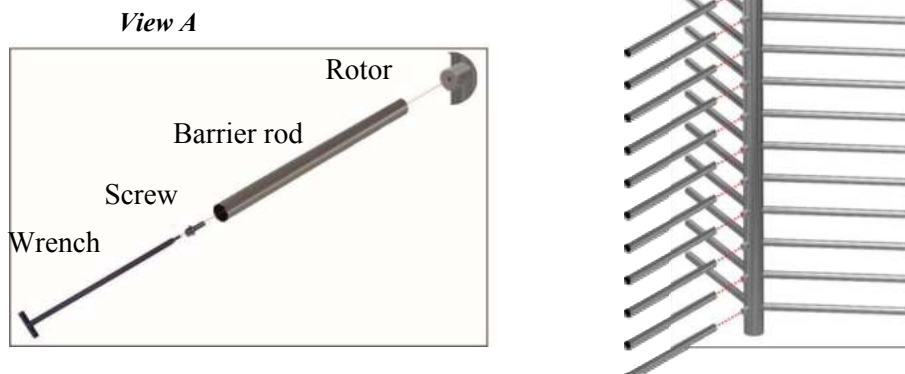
Assembly of the turnstile major components and installation of barrier rods
